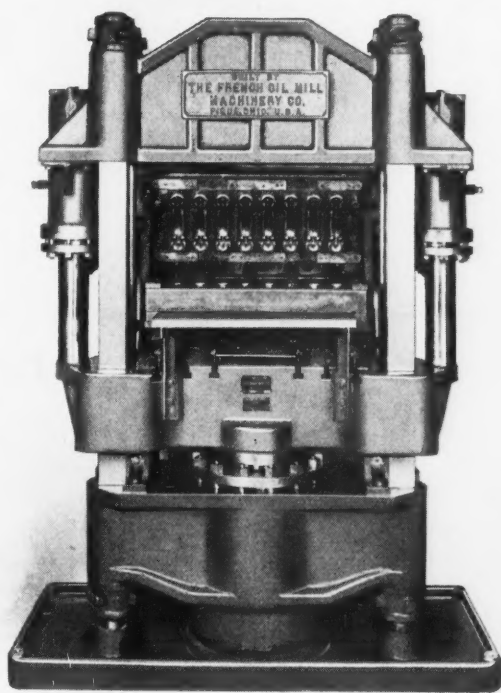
Tilting Die Type of Plastic-Products Molding Press Built by the French Oil Mill Machinery Co.
